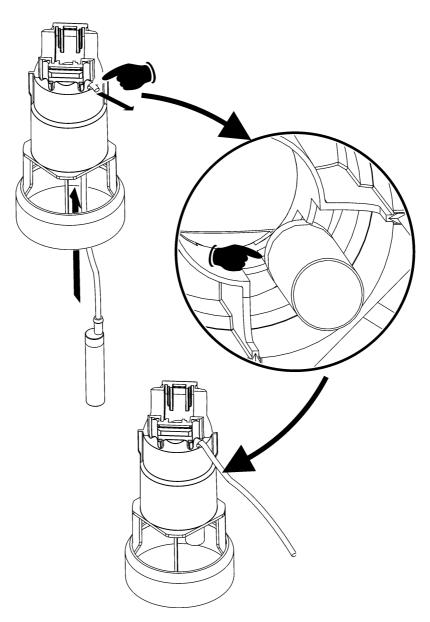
Mounting of sensor AFS 01-60 for control pan Fluxx
